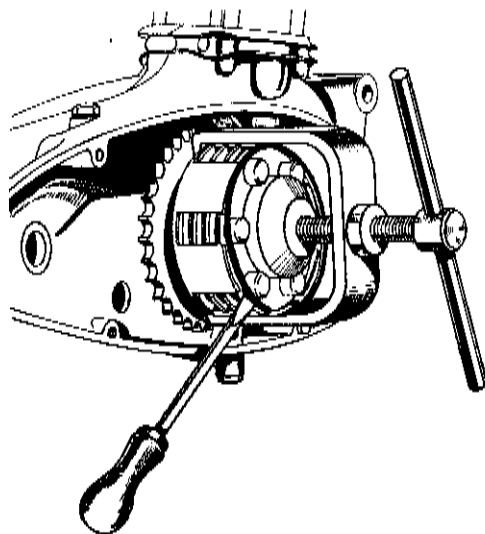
Removing the Clutch Plate Circlip with Service Tool No. 61-3191.
